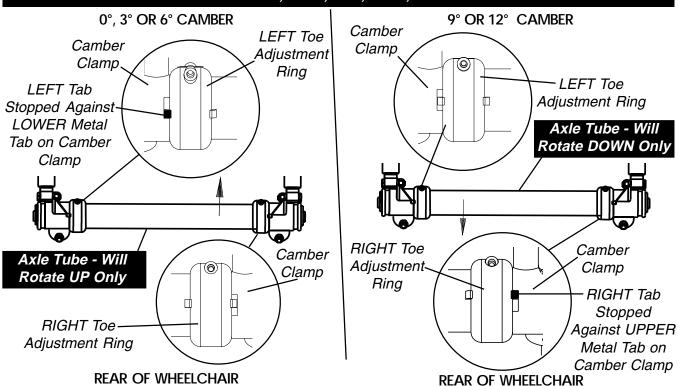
ADJUSTING TOE IN/TOE OUT
